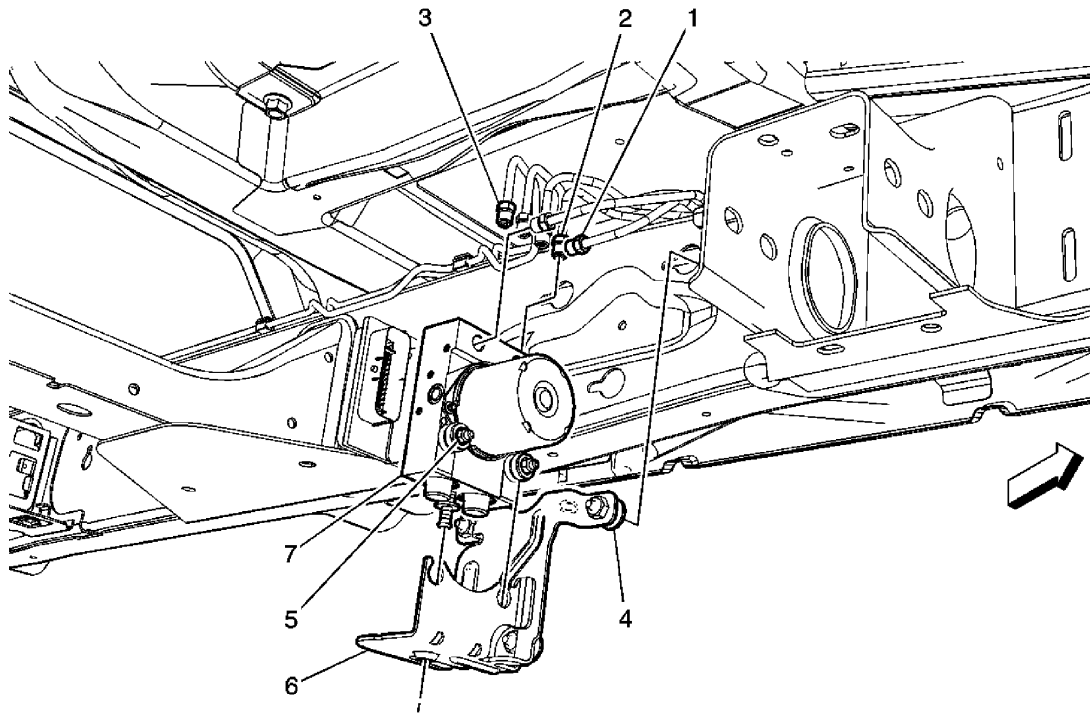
View Of Brake Pressure Modulator Valve & Components
